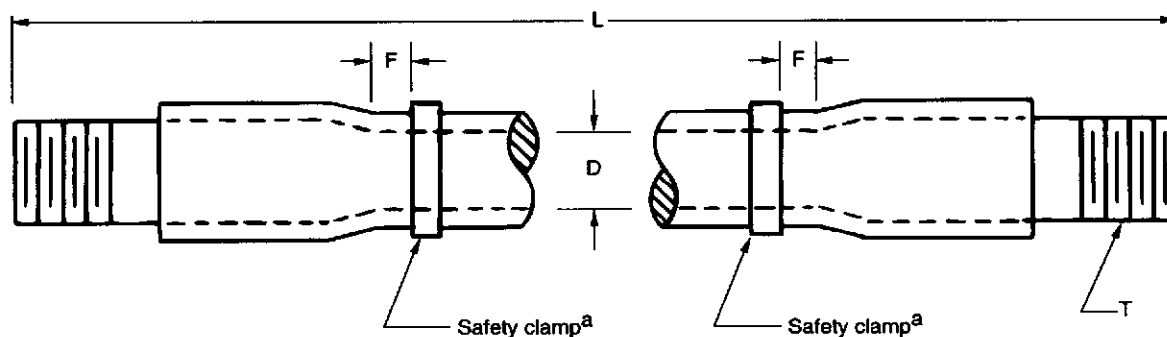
Rotary Vibrator and Drilling Hose Dimensions
